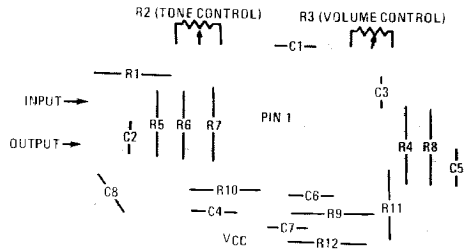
PRINTED CIRCUIT BOARD (Foil Side)
